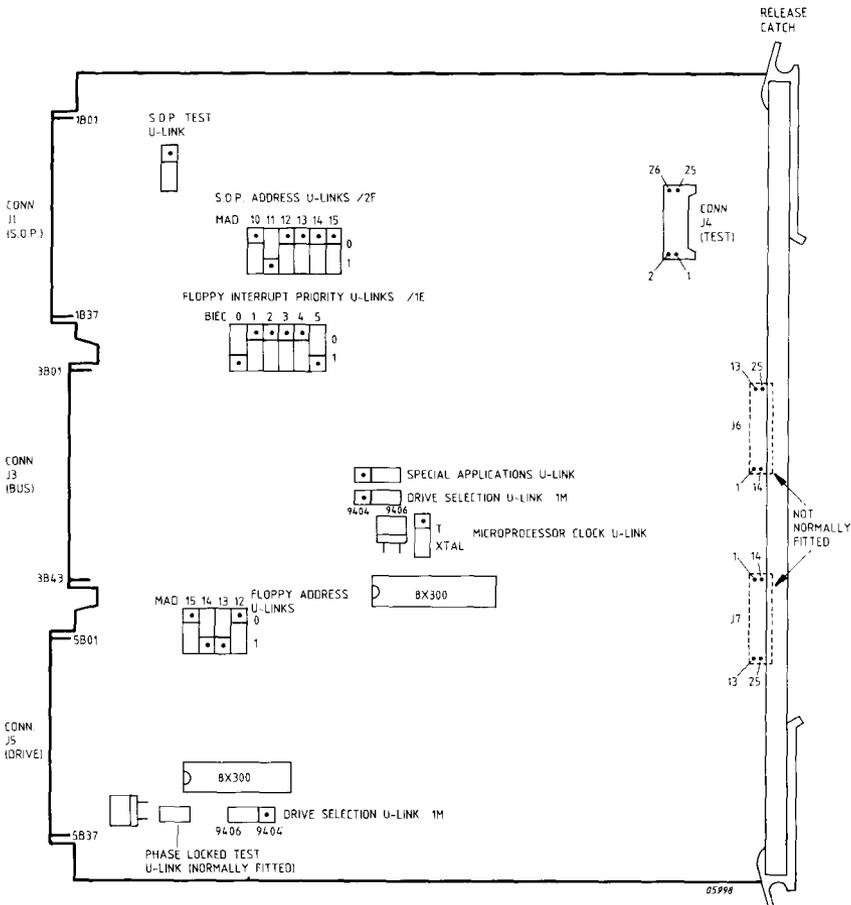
LAYOUT OF FIMB CARD WITHOUT ADDED PCB
